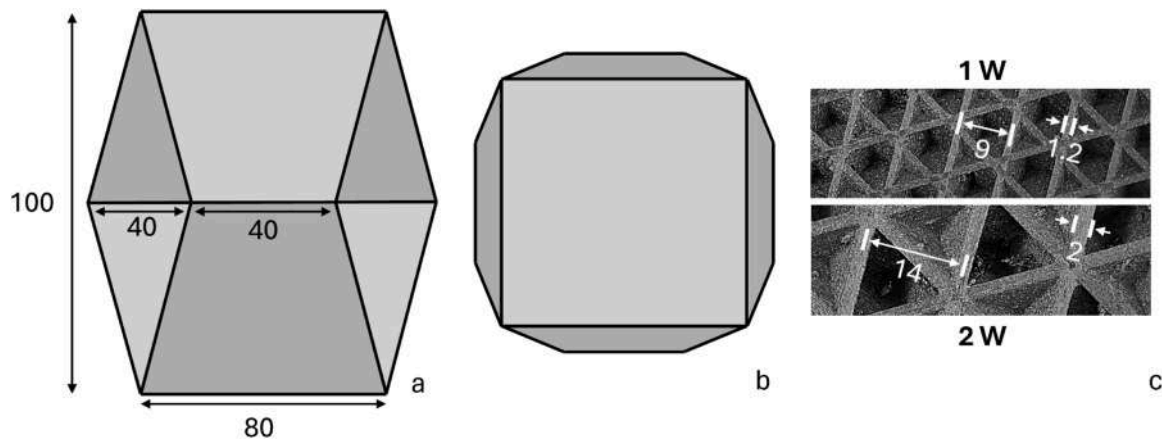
Scheme of the crash box geometry, with side view (a), top view (b), and details of the internal 3D-printed structures (c). Dimensions are expressed in millimeters.
